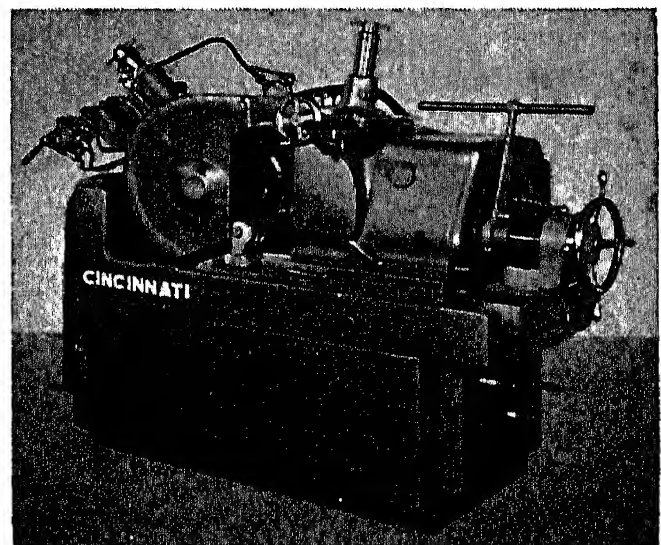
A No. 2 centerless grinder arranged for infeed grinding. (Courtesy Cincinnati Grinders, Inc.)
